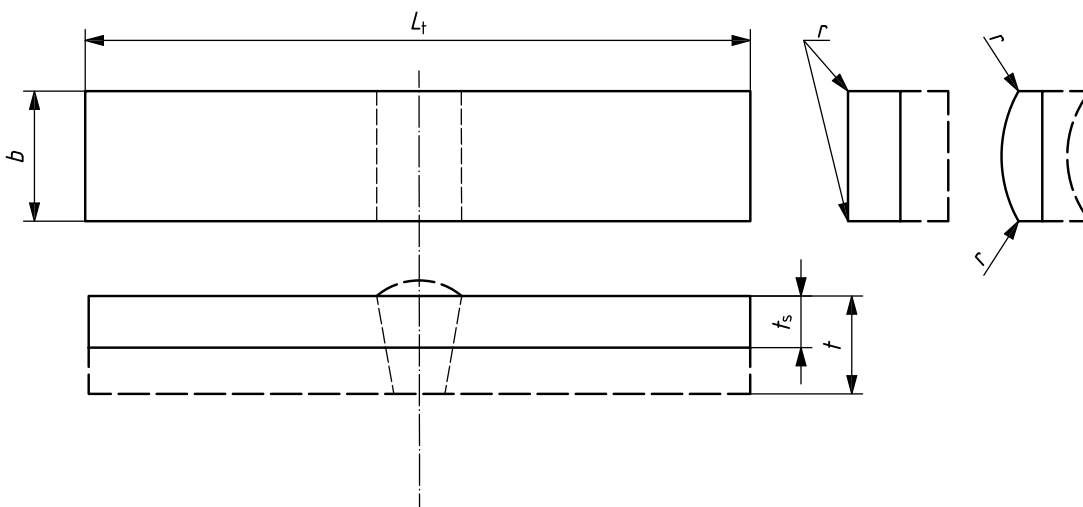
Transverse face bend test specimen for a butt weld (TFBB)
